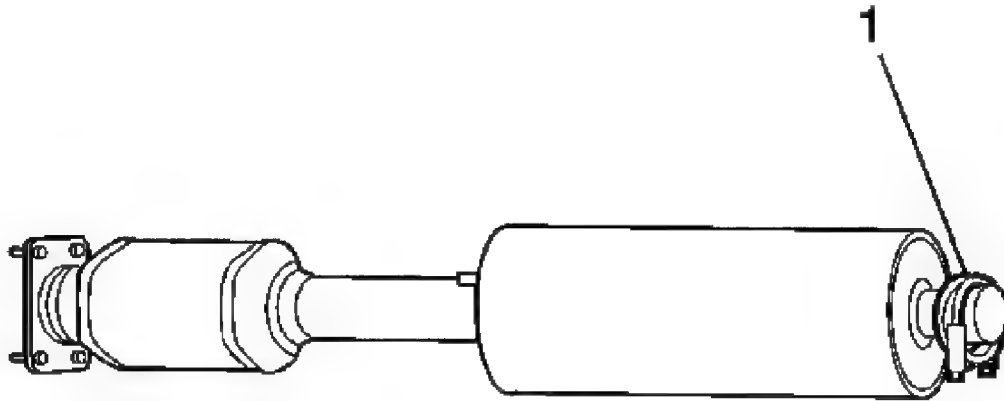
Identifying Catalytic Converter Assembly Outlet Pipe Clamp
